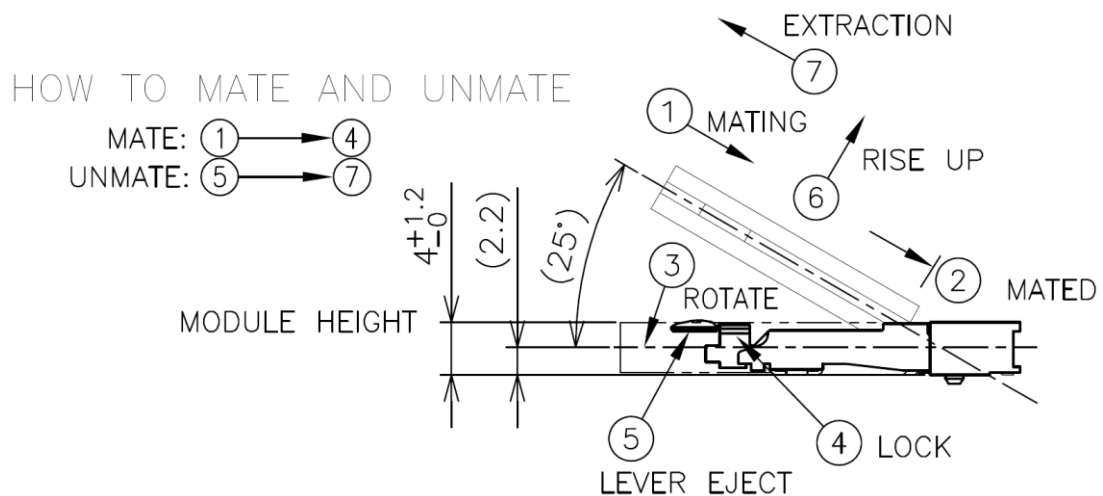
Instructions how to Mount/Remove the an OEM Board
